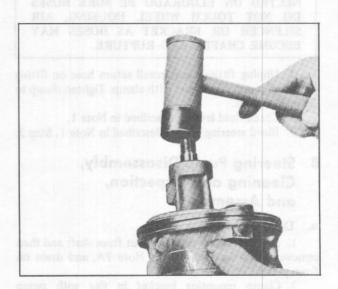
Tapping Shaft to Unseat Pressure Plate
